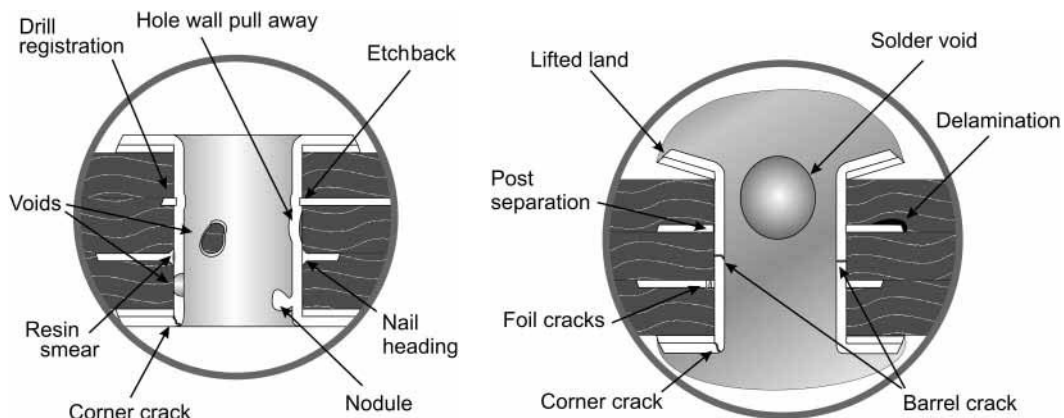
Examples of potential copper plating defects that might be encountered in the examination of plated-through hole cross sections. On the left is a hole before solder stress testing, and on the right is an example of a through hole after solder stress testing. Not all defects are cause for rejection; some are simply cause for concern as indicators of possible process control problems.
